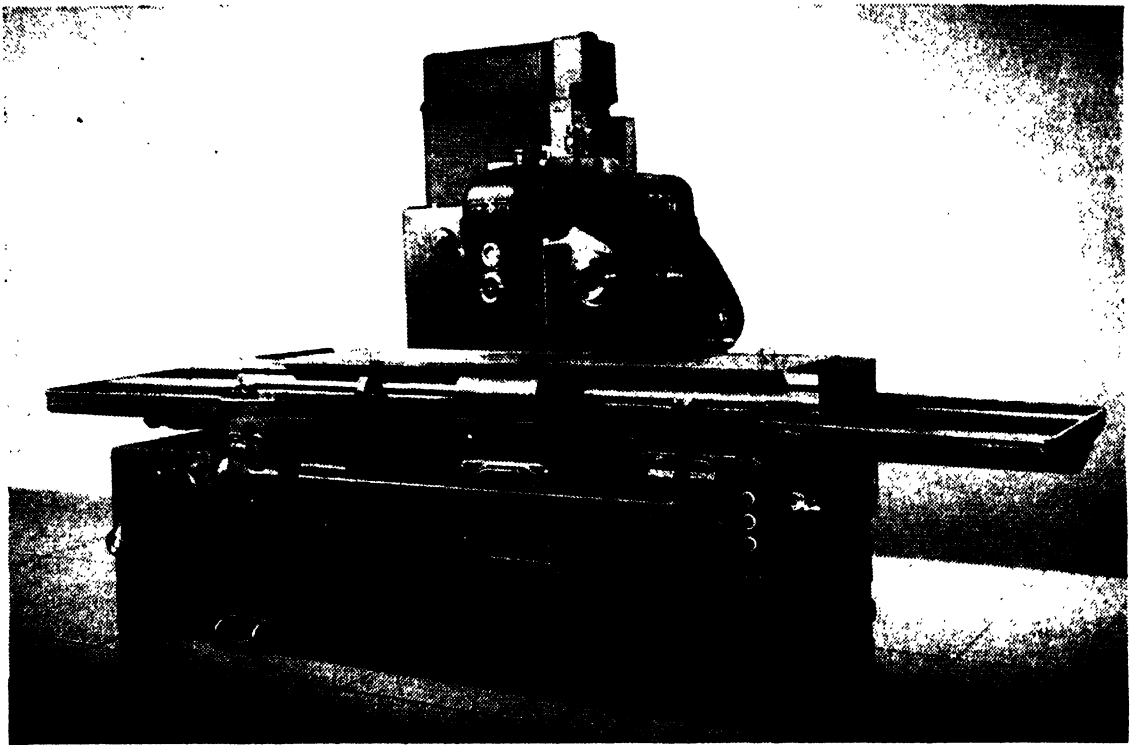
Cincinnati Hydromatic milling machine. (*Cincinnati Milling Machine Co., Cincinnati, Ohio.*)
